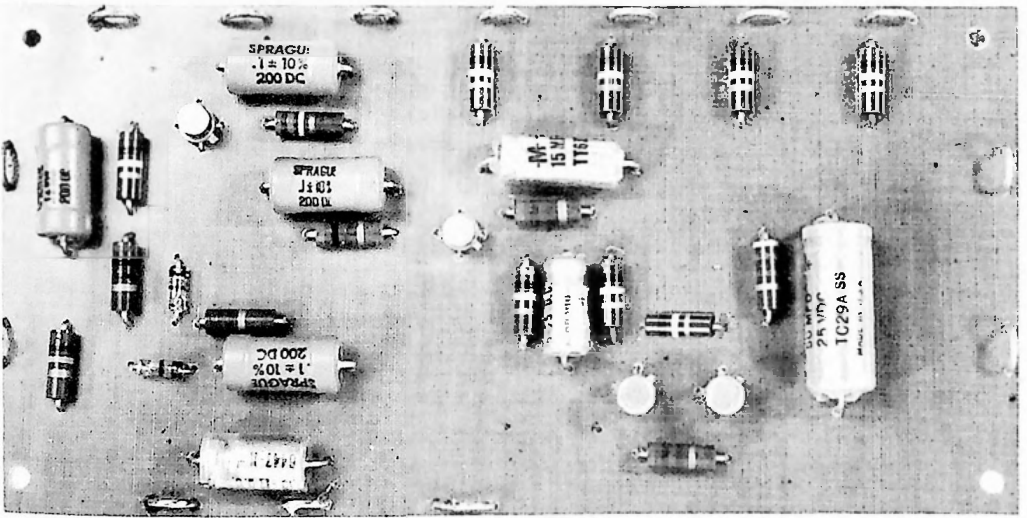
Components for audio-mixer, compressor, and line-driver circuit mounted on circuit board.
